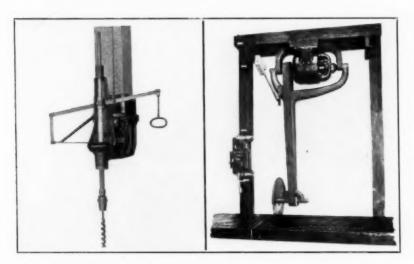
Wood-Boring Machine Driven by Induction Motor, Through Single Pair of Bevel Gears
